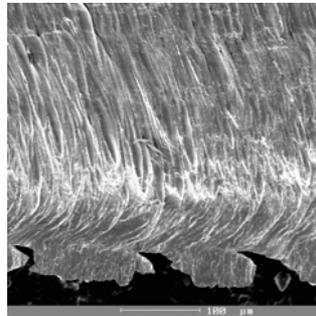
Plastic deformation of chip section by drilling of stainless steel, REM
